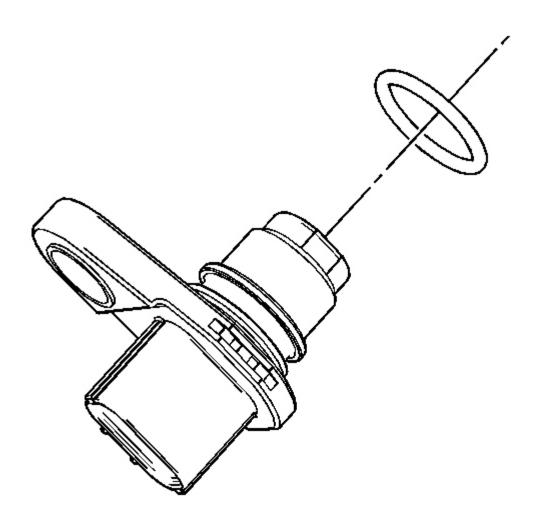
CKP Sensor O-Ring Seal Courtesy of GENERAL MOTORS CORP.
